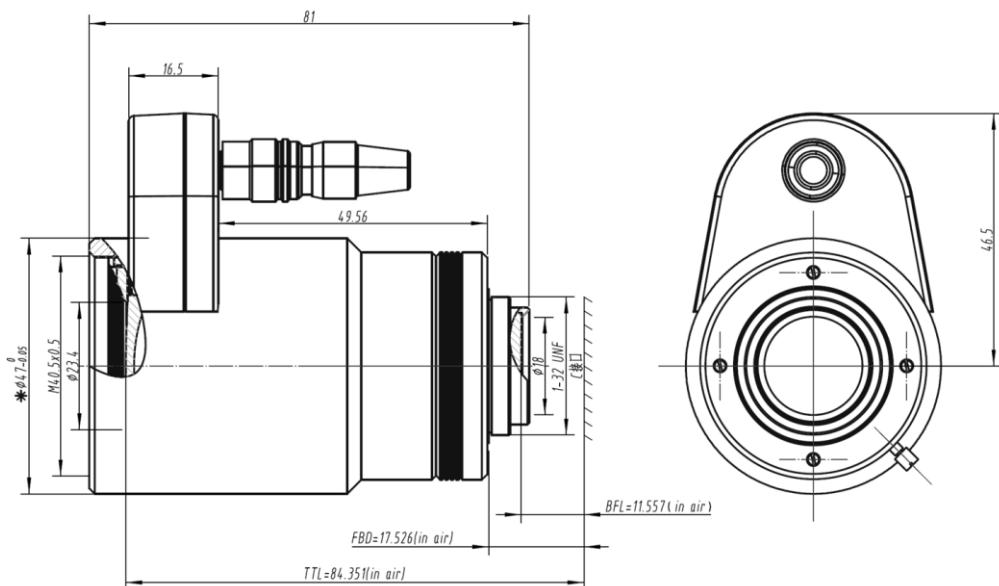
Mechanical drawing of the ELM-50-3.5-18-C
